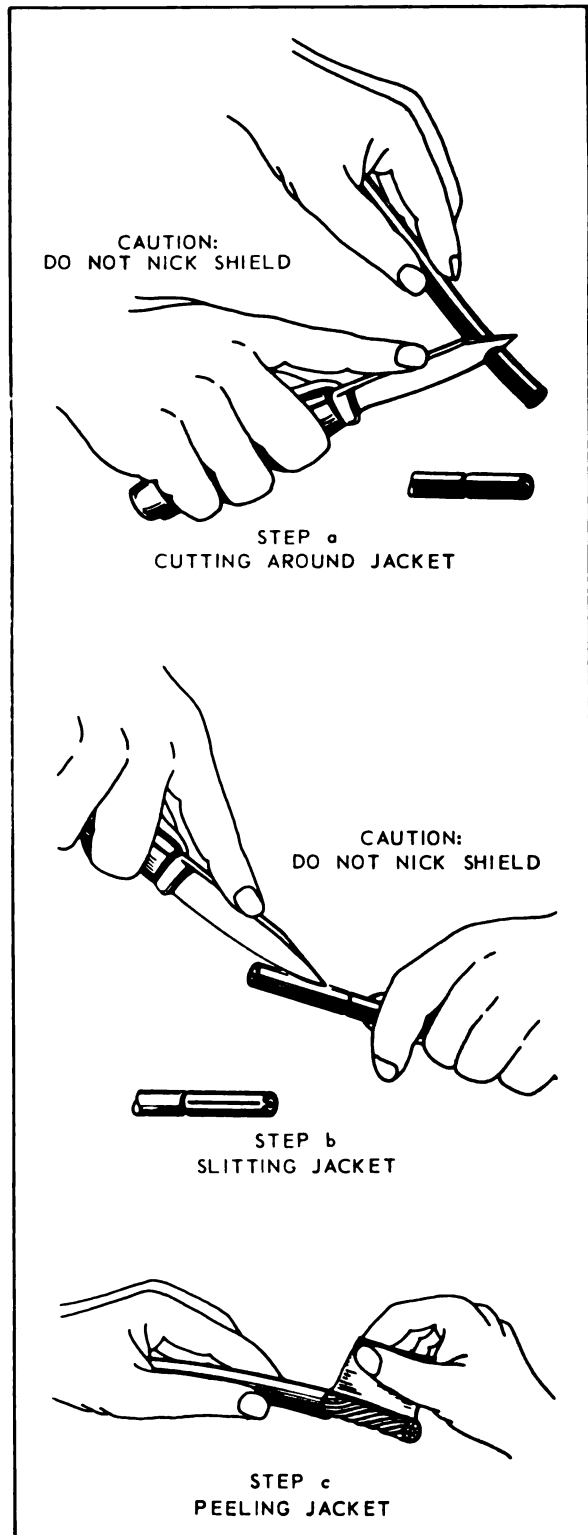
Stripping Outer Jacket from Coaxial Cable
